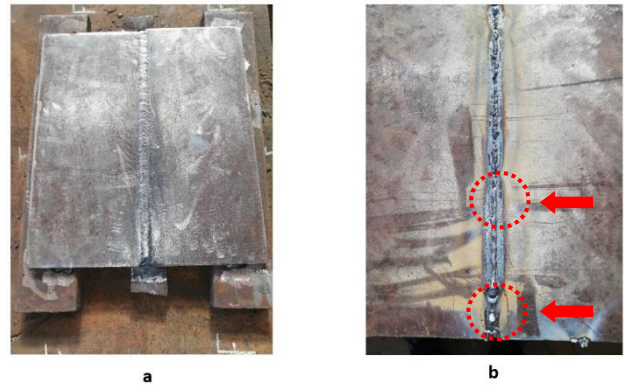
Second welding joints: a) Face pass. b) Root
